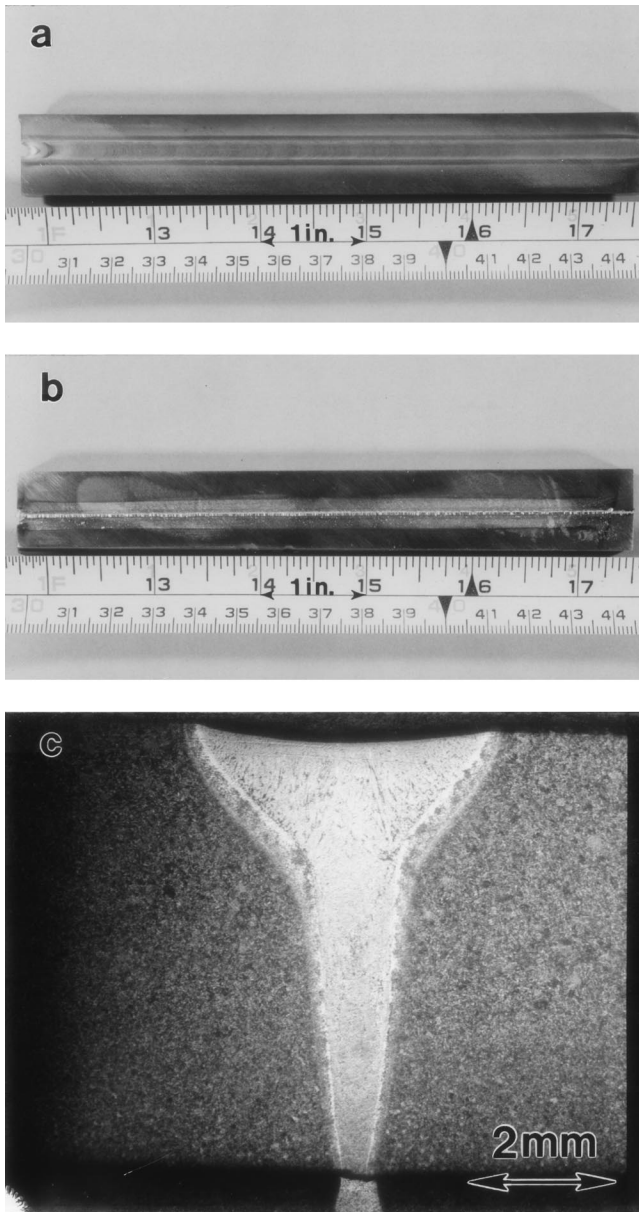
Optical photographs showing the (a) top surface, (b) bottom surface, and (c) cross section of a crack-free weld, which was made at a cooling rate of 380 °C/s.
